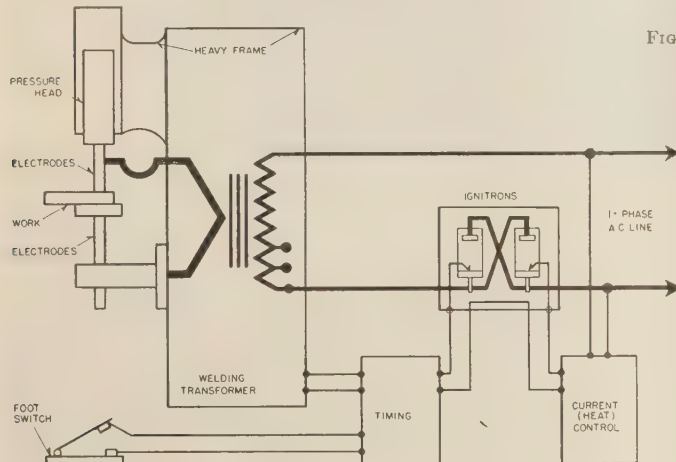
SCHEMATIC ARRANGEMENT OF A SPOT WELDER AND ITS CONTROL
